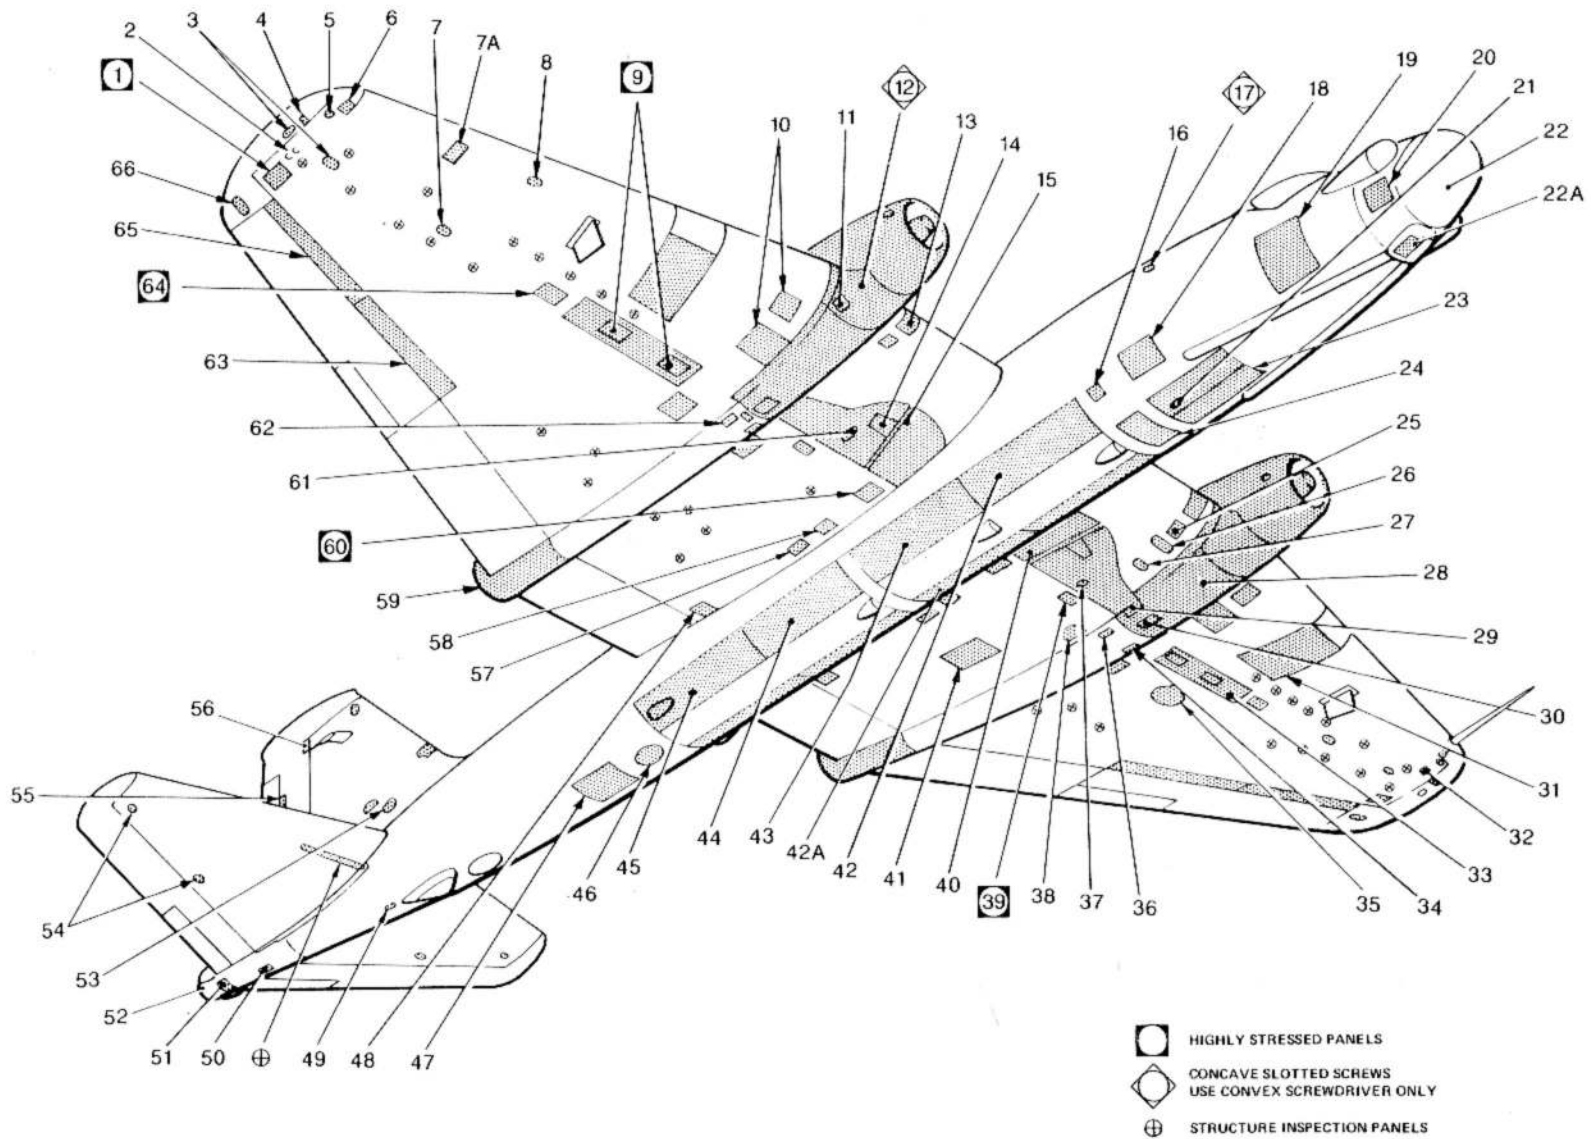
ACCESS PANELS, LOWER SURFACE AND STARBOARD SIDE
